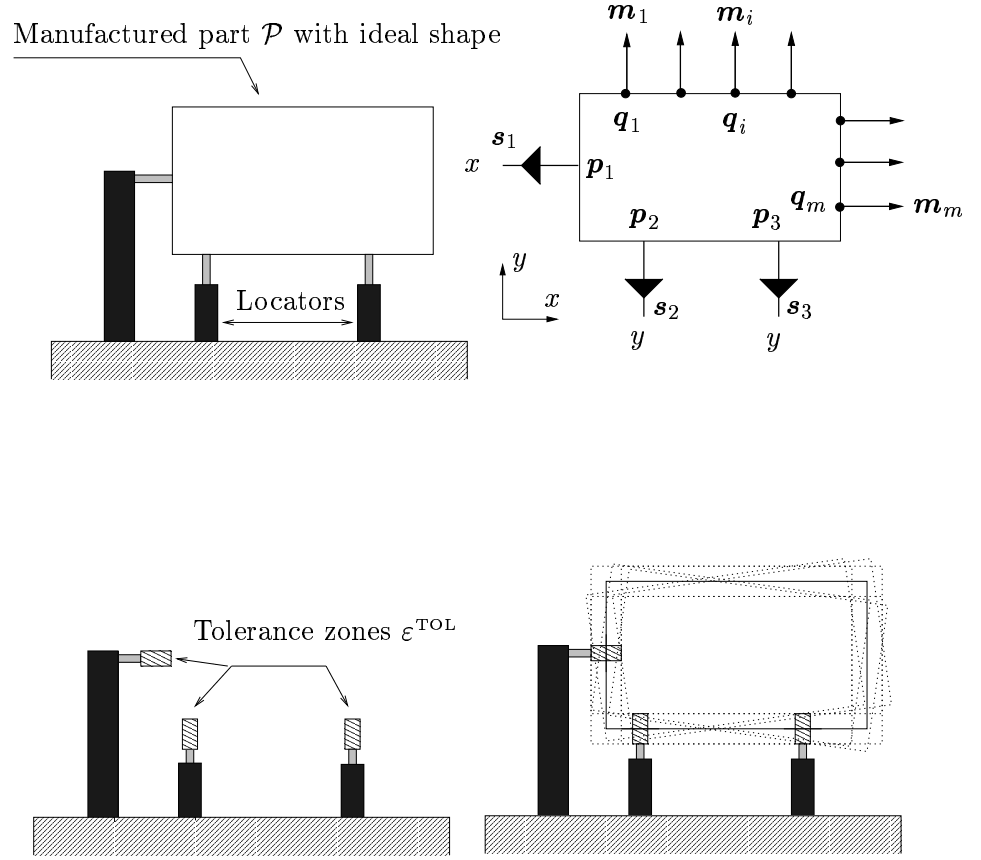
The upper left figure shows a box resting on the locators that constitute the fixture. The upper right figure illustrates the datum system of the box. The datum system consists of the datum points $\{p_j\}_{j=1}^3$ and their guiding directions $\{s_j\}_{j=1}^3$. Please observe that in the two dimensional case illustrated here it is sufficient to have three datum points since a rigid body motion in the plane only has three degrees of freedom. The upper right picture also illustrates the inspection points $\{q_i\}_{i=1}^m$ and their evaluation directions $\{m_i\}_{i=1}^m$. The lower left figure shows the tolerance zones of the locators. The lower right figure demonstrates the possible dislocations of the box due to locator perturbations within the tolerance zones.
